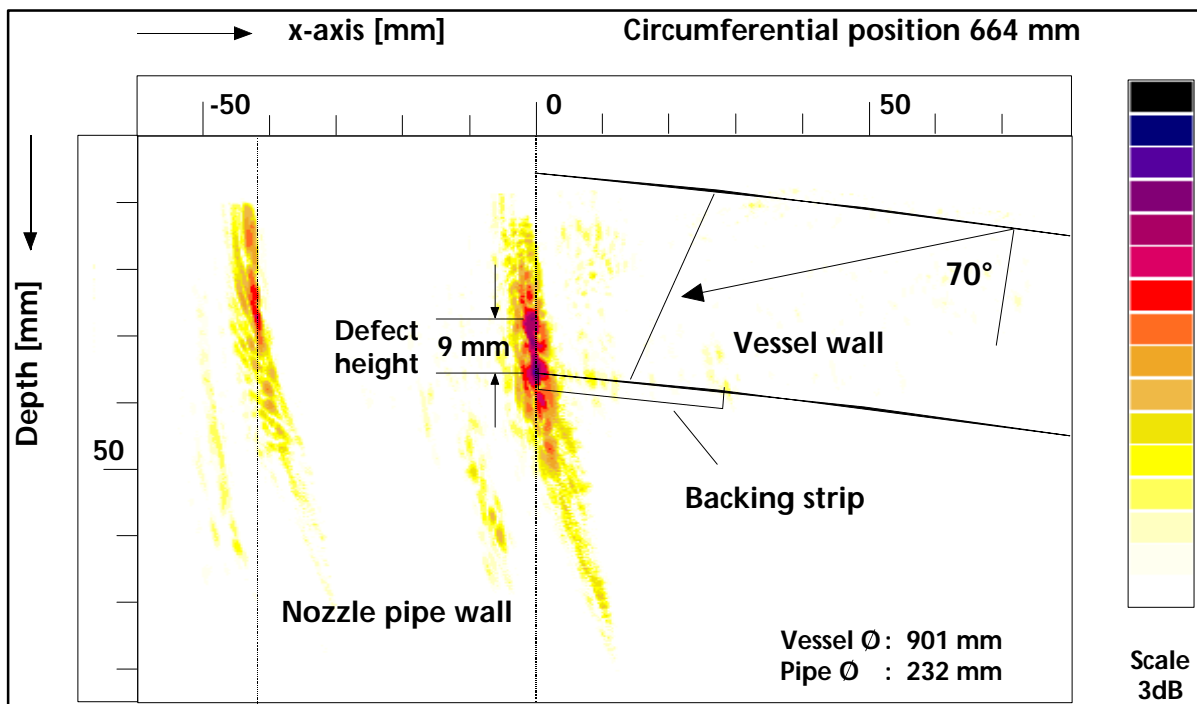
SAFT Reconstruction of Root Cracking; B-scan, Search Unit MWB70-2
